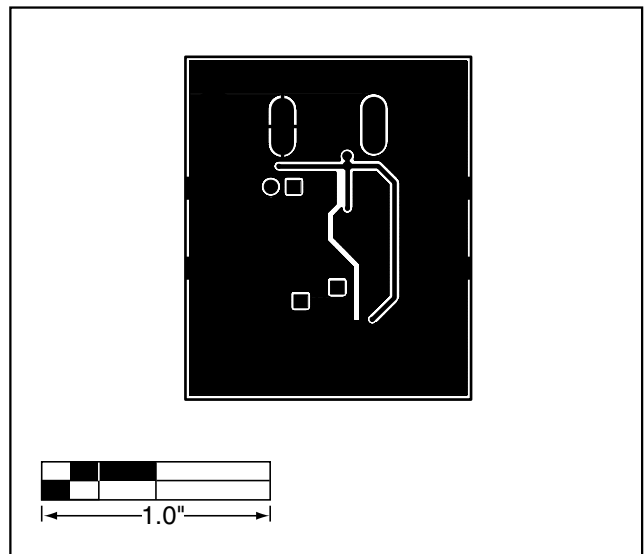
MAX2840 EV Kit PC Board Layout—Secondary Side
